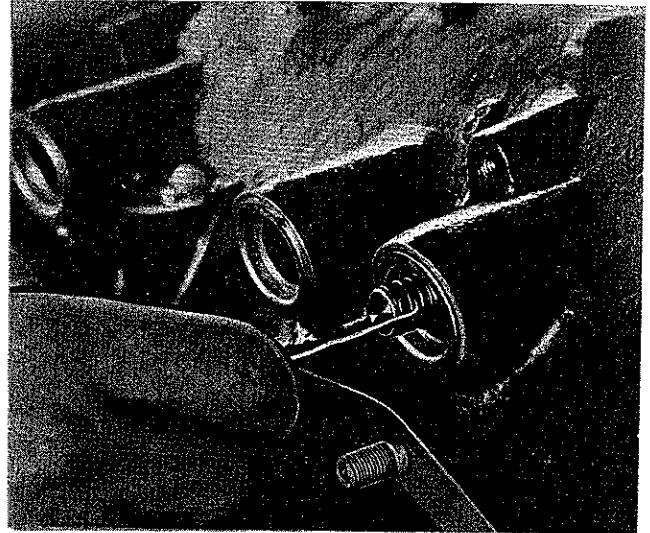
Removing Hydraulic Tappet Plunger Assembly
